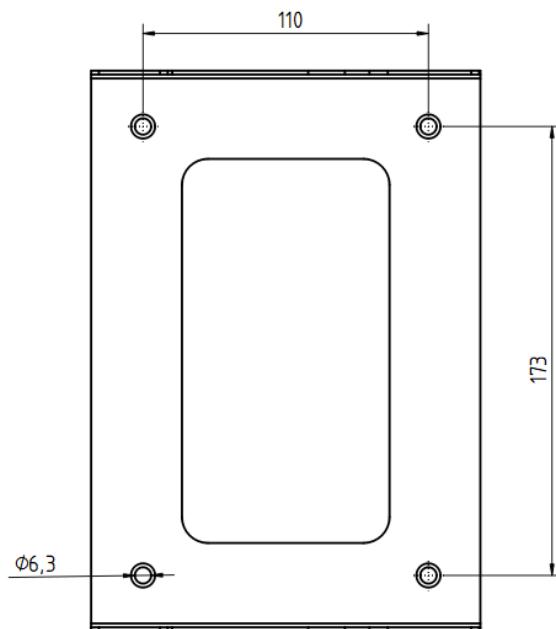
mounting dimensions for Nest-2800W bracket
